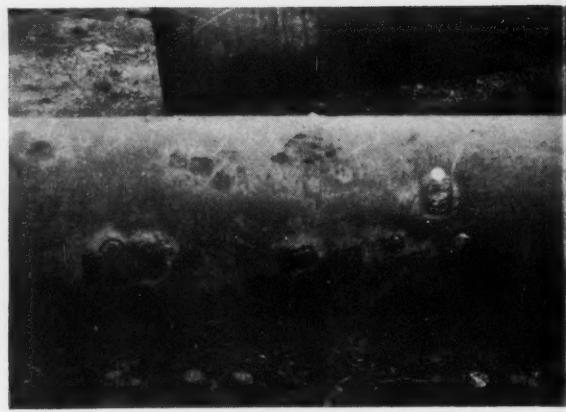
Close-up view of pipe section showing spot welding of pitted areas. Note 1-inch diameter reference spot.
